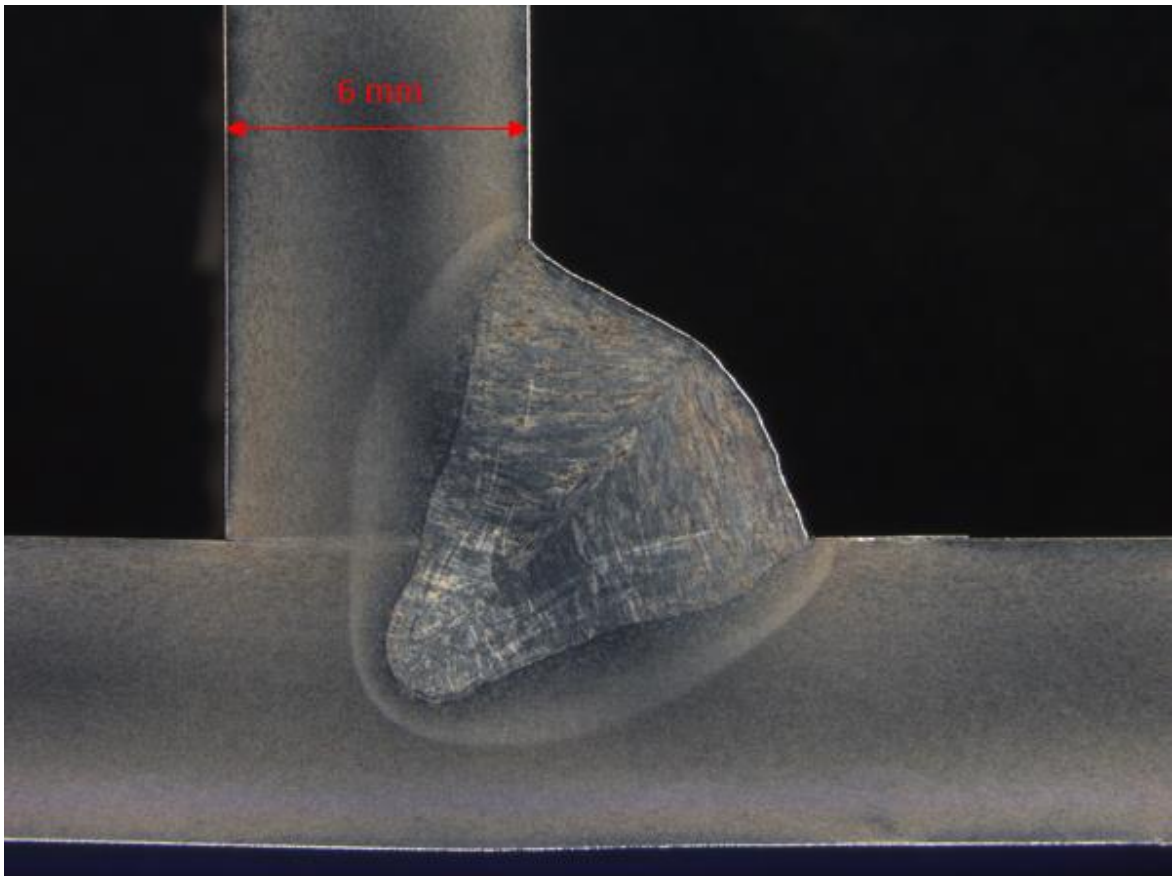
Macro image of WiseSteel 60A/600Hz weld bead.
